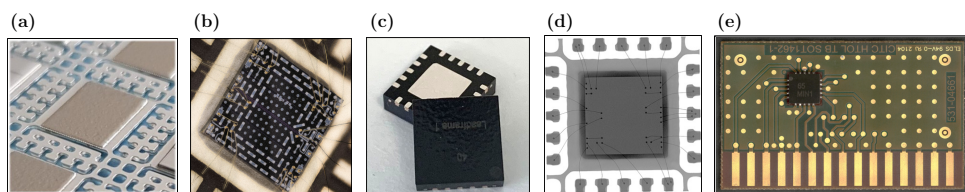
Illustration of the steps involved in the package assembly process. (a) Micro-Ag sinter material screen printed on a leadframe, (b) Sintering of a test chip onto the leadframe with wire bonding, (c) Molded, singulated, and laser marked PQFN packages, (d) X-ray inspection of a molded package, and (e) PQFN soldered to a test board for online measurements.
